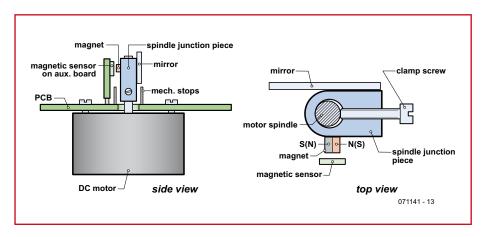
This figure shows how the mirror is attached to the servo shaft and how the angle sensor is constructed.
